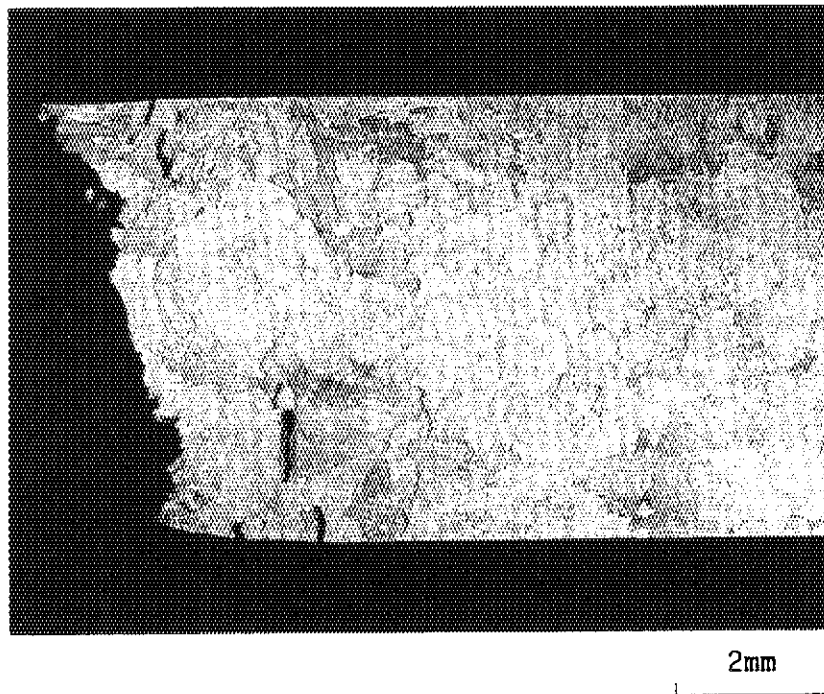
Microstructure of fracture section for Hastelloy XR weld metal (900°C, 2389.4h, 38.0MPa, thickness: 60mm, specimen No.GTC-4)
